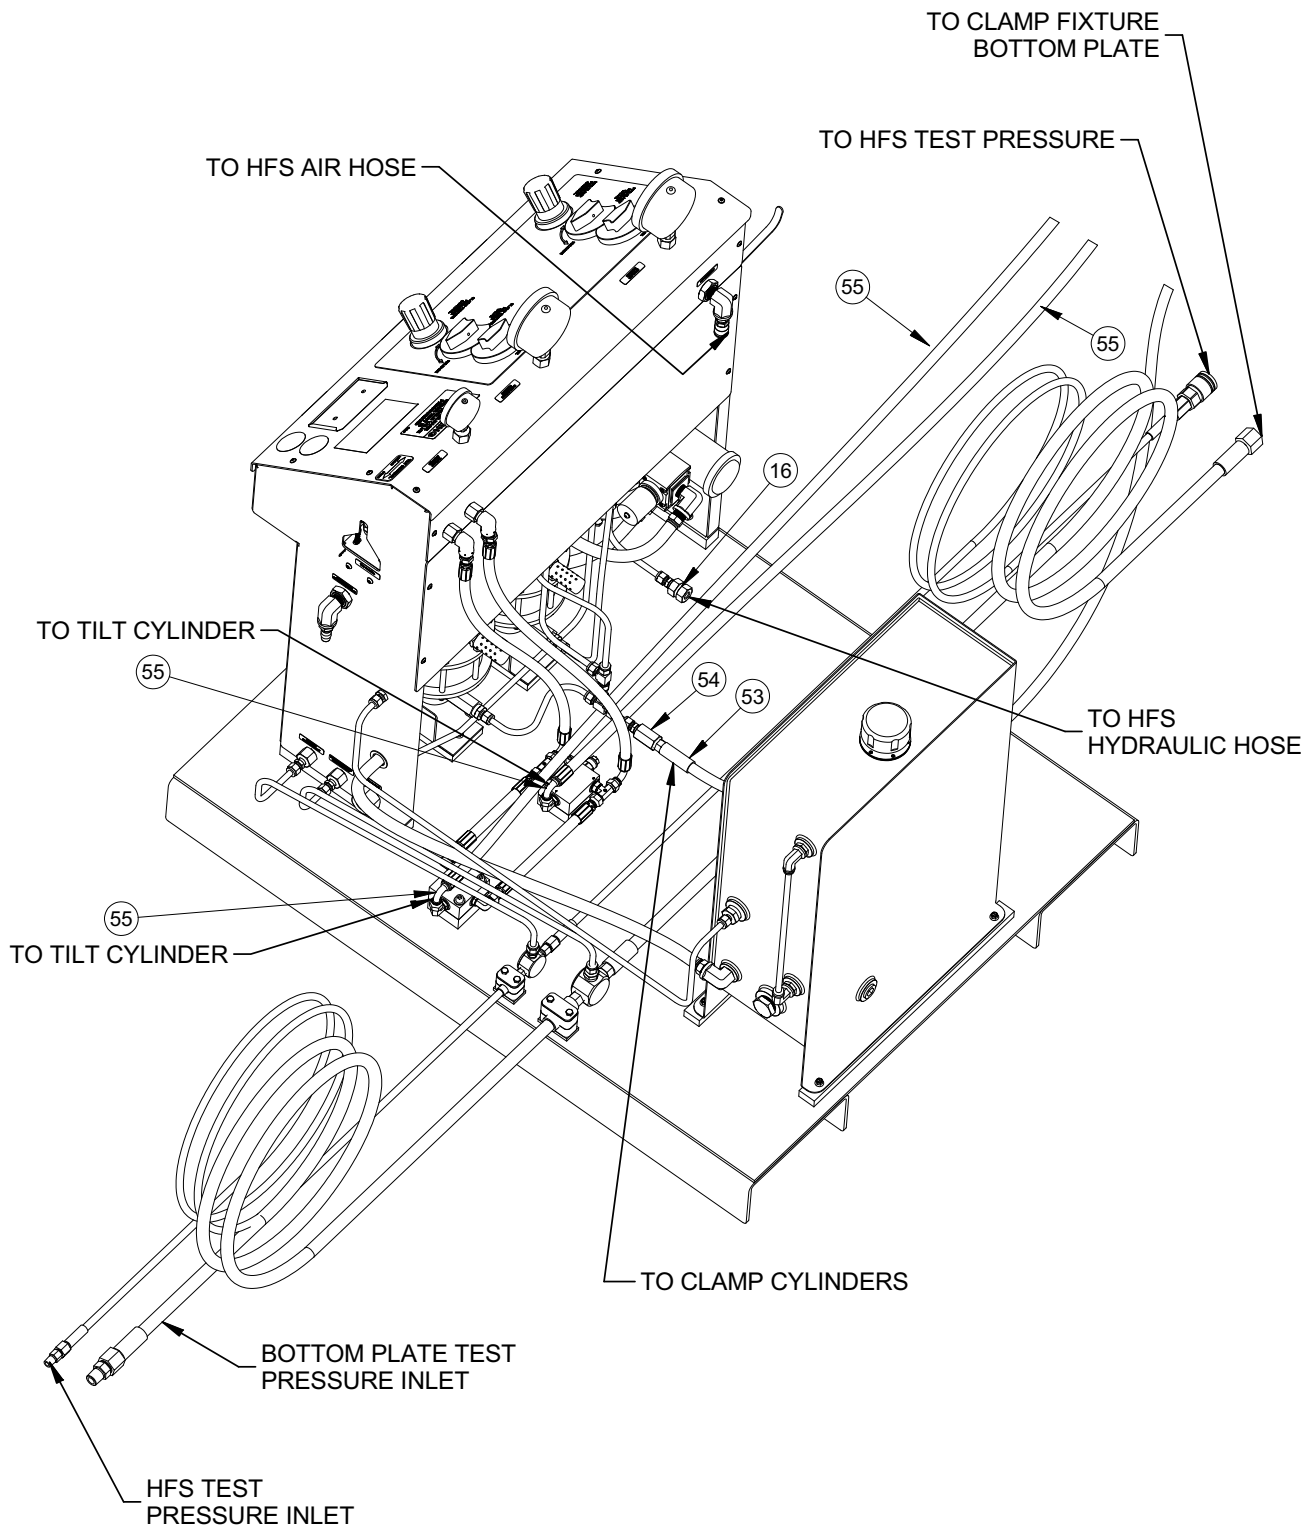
UFV-24-300T HOSE ASSEMBLY (P/N 91681)
